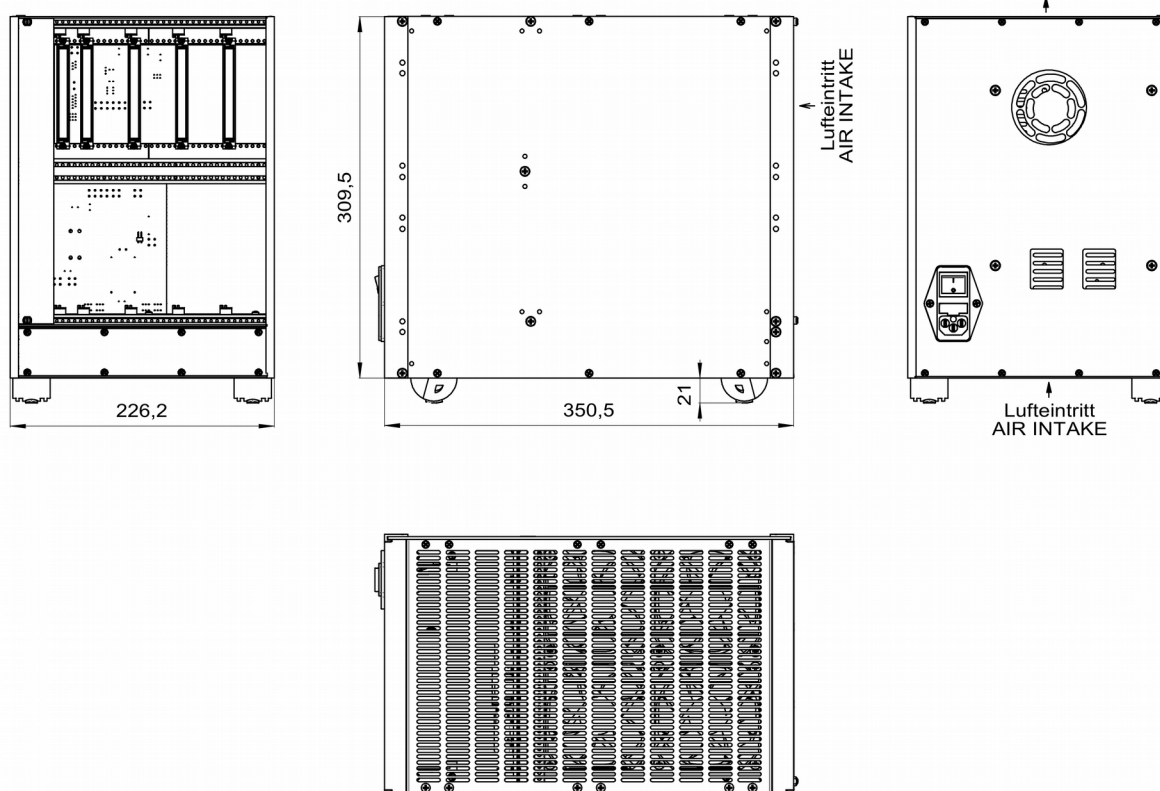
Dimensional drawing ECH 244 - 4 channel MMS HV crate
